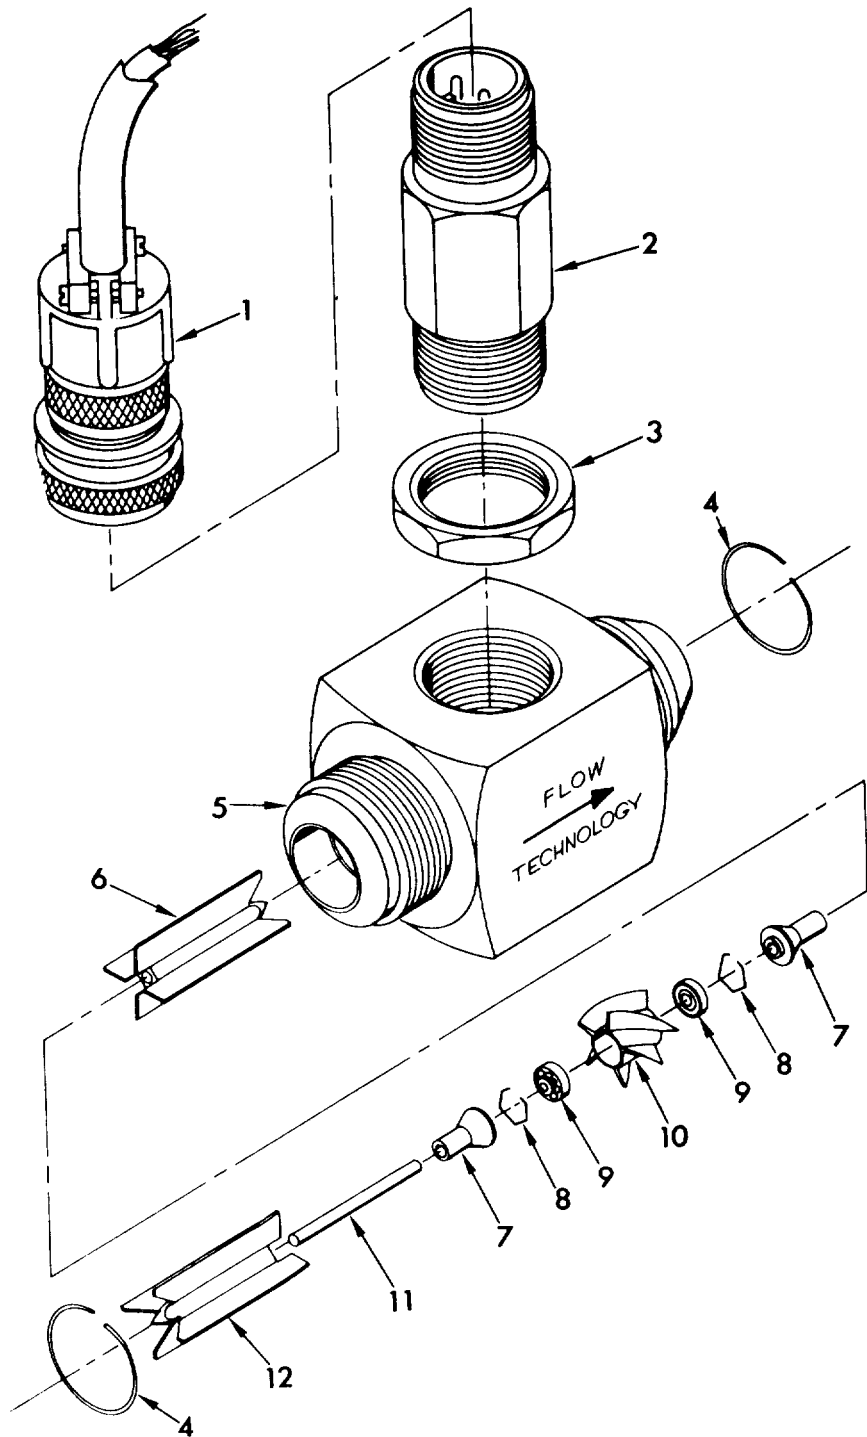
COMPLETE DISASSEMBLY 1/2" FLOW TRANSDUCER.
